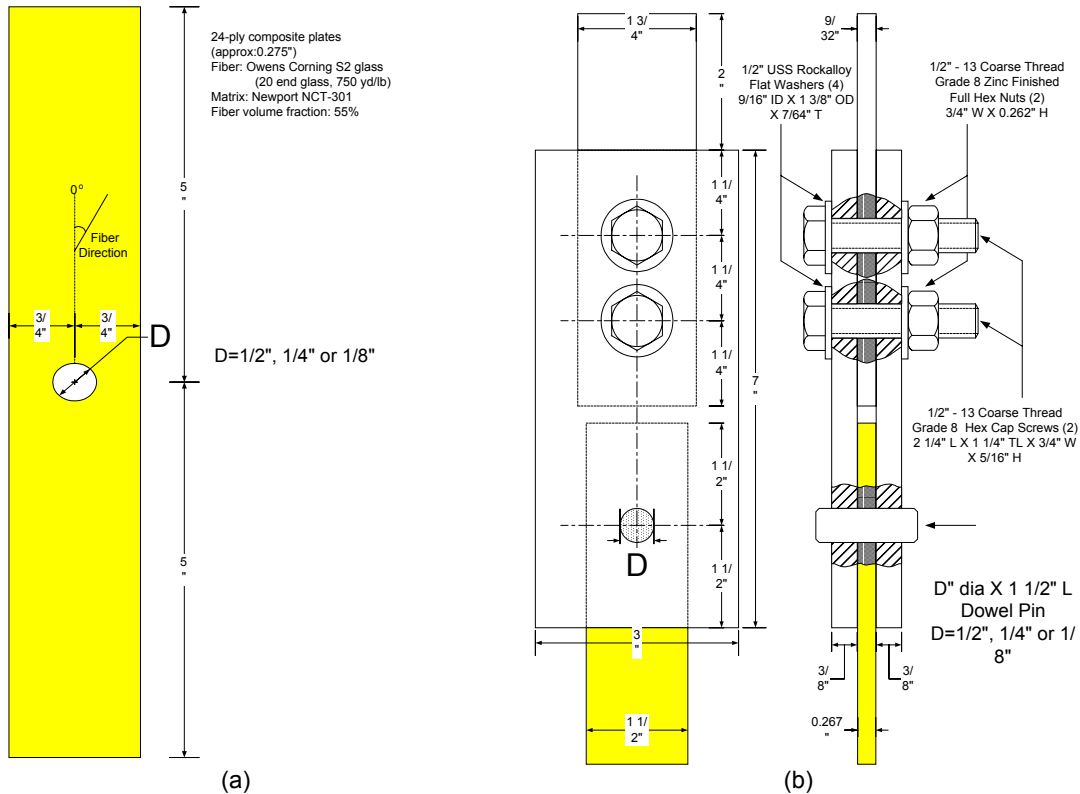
(a) Composite strip specimen with a center hole and (b) Joint specimen with metal-strip holdings.
